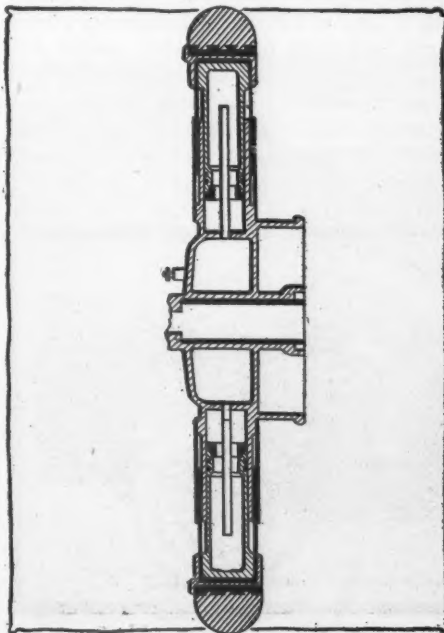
AUSTRIAN PNEUMATIC WHEEL
